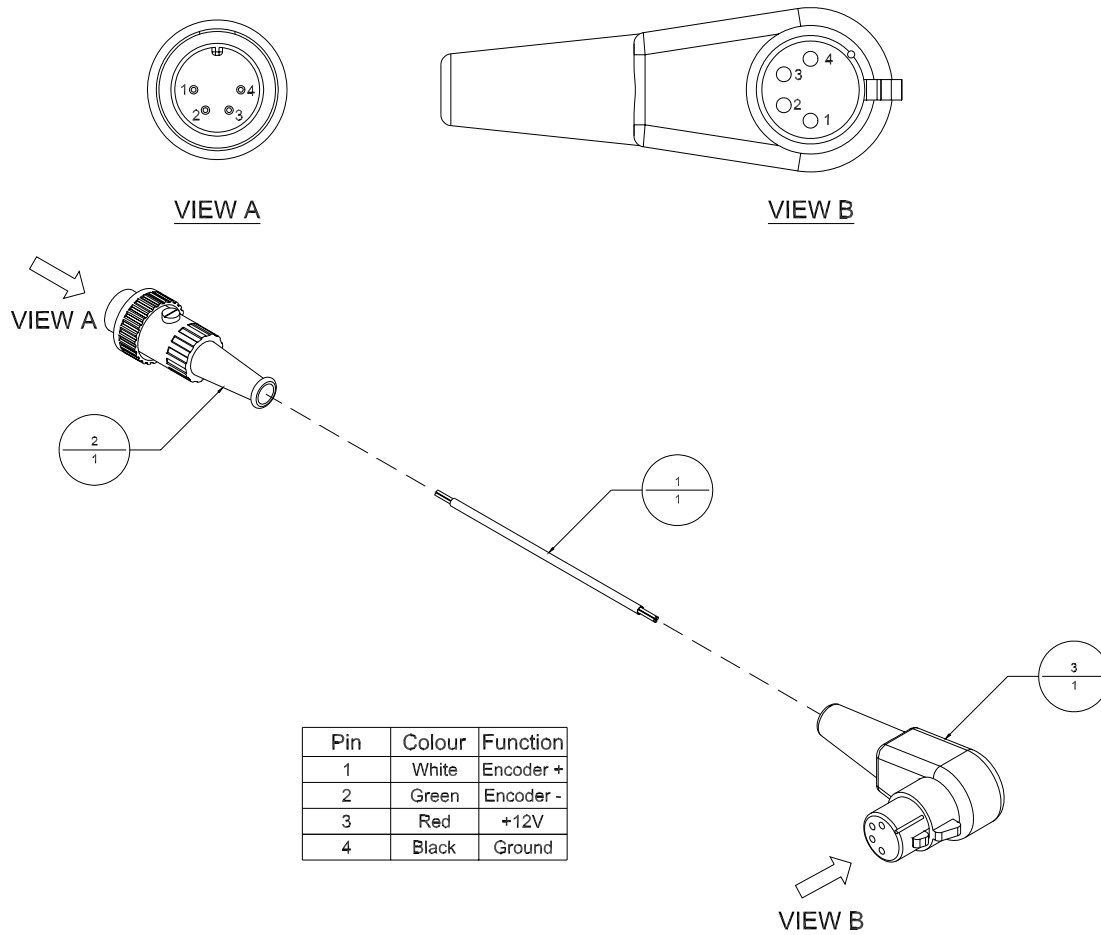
Encoder Cable Assembly, BK730 (9101658A)
